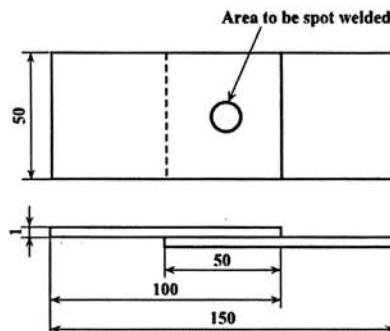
Shape and dimensions of a specimen for spot welding
